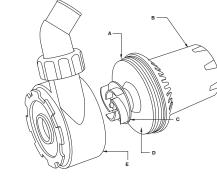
A. Note: Motor will be loose, don't let water enter this joint B. Motor Housing E. Pump Chambe
